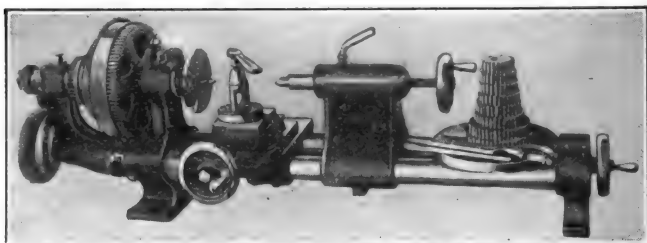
A good amateur bench lathe with parallel steel rods for the bed.
